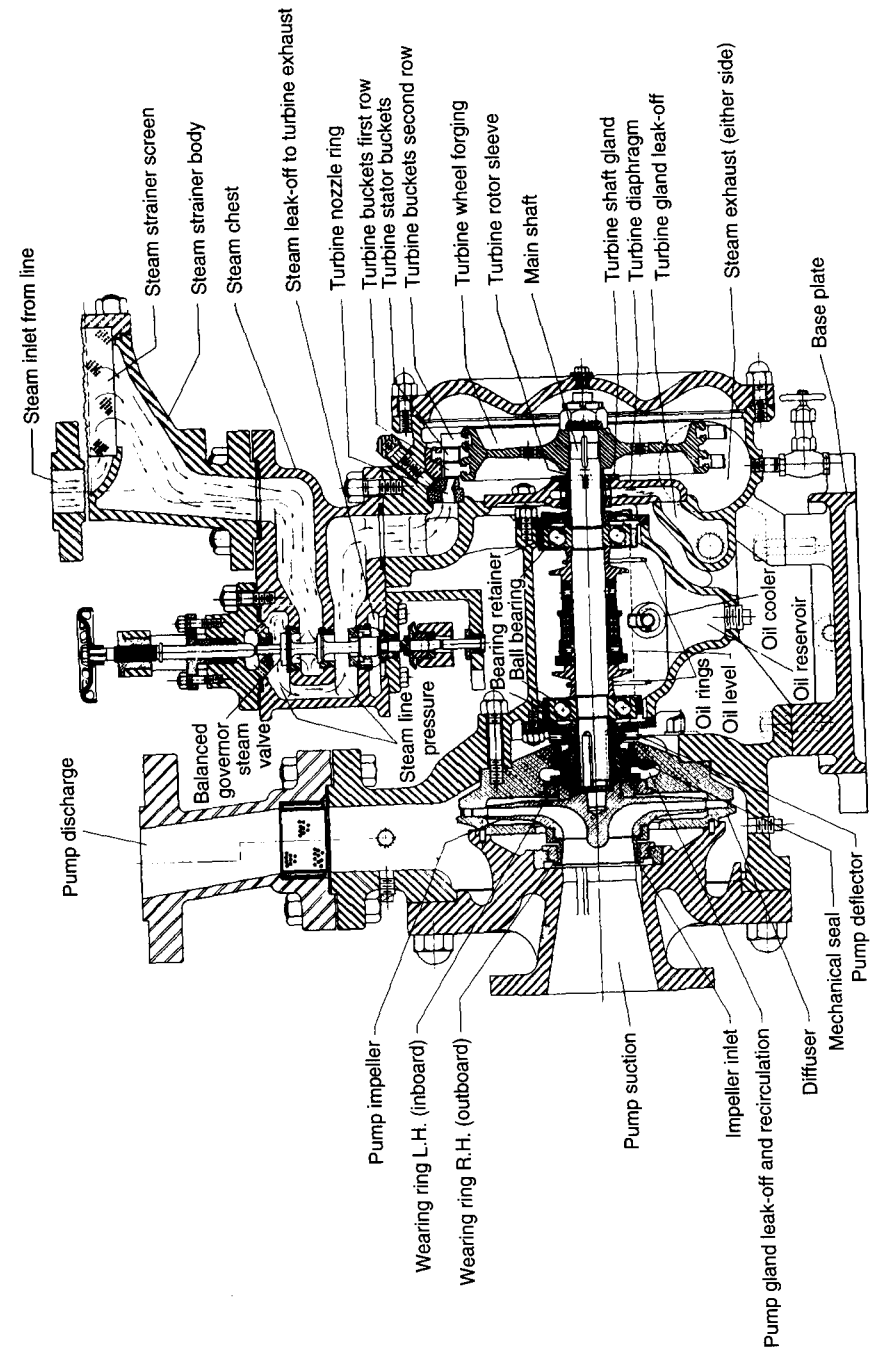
Close-coupled steam-turbine-driven main feed pump. Courtesy Coffin Turbo Pump, Inc.
